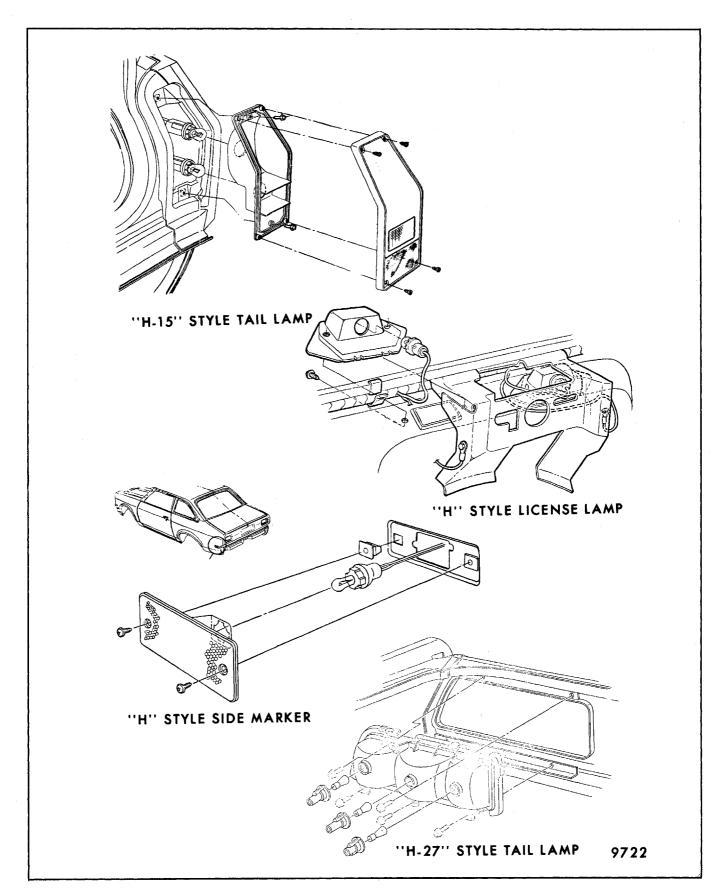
Exterior Lamp Installation - Pontiac Styles
